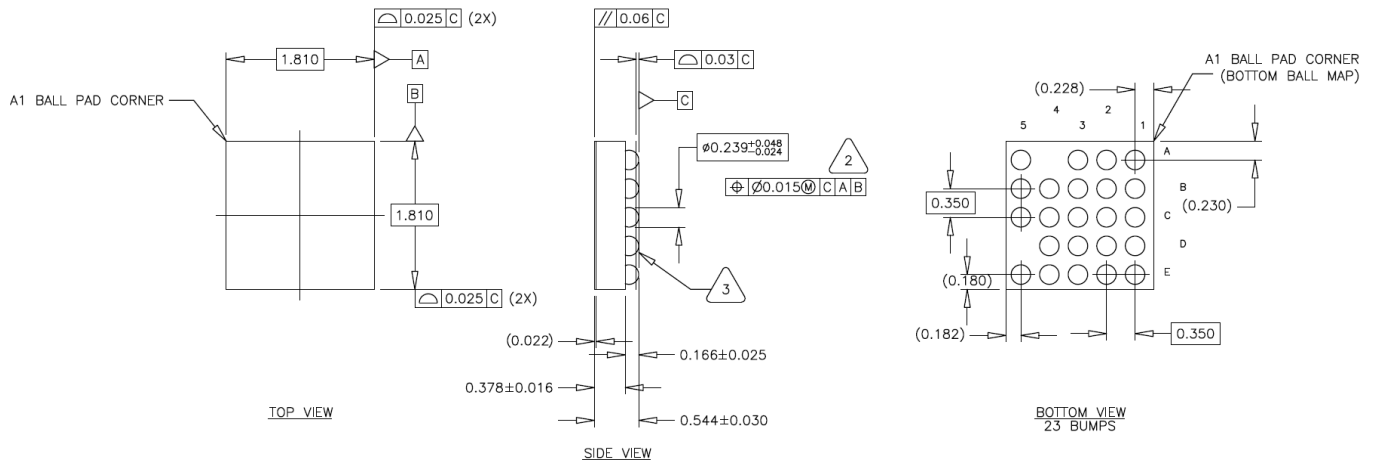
WLCSP23 Mechanical Drawing (All dimensions are in millimetres)
